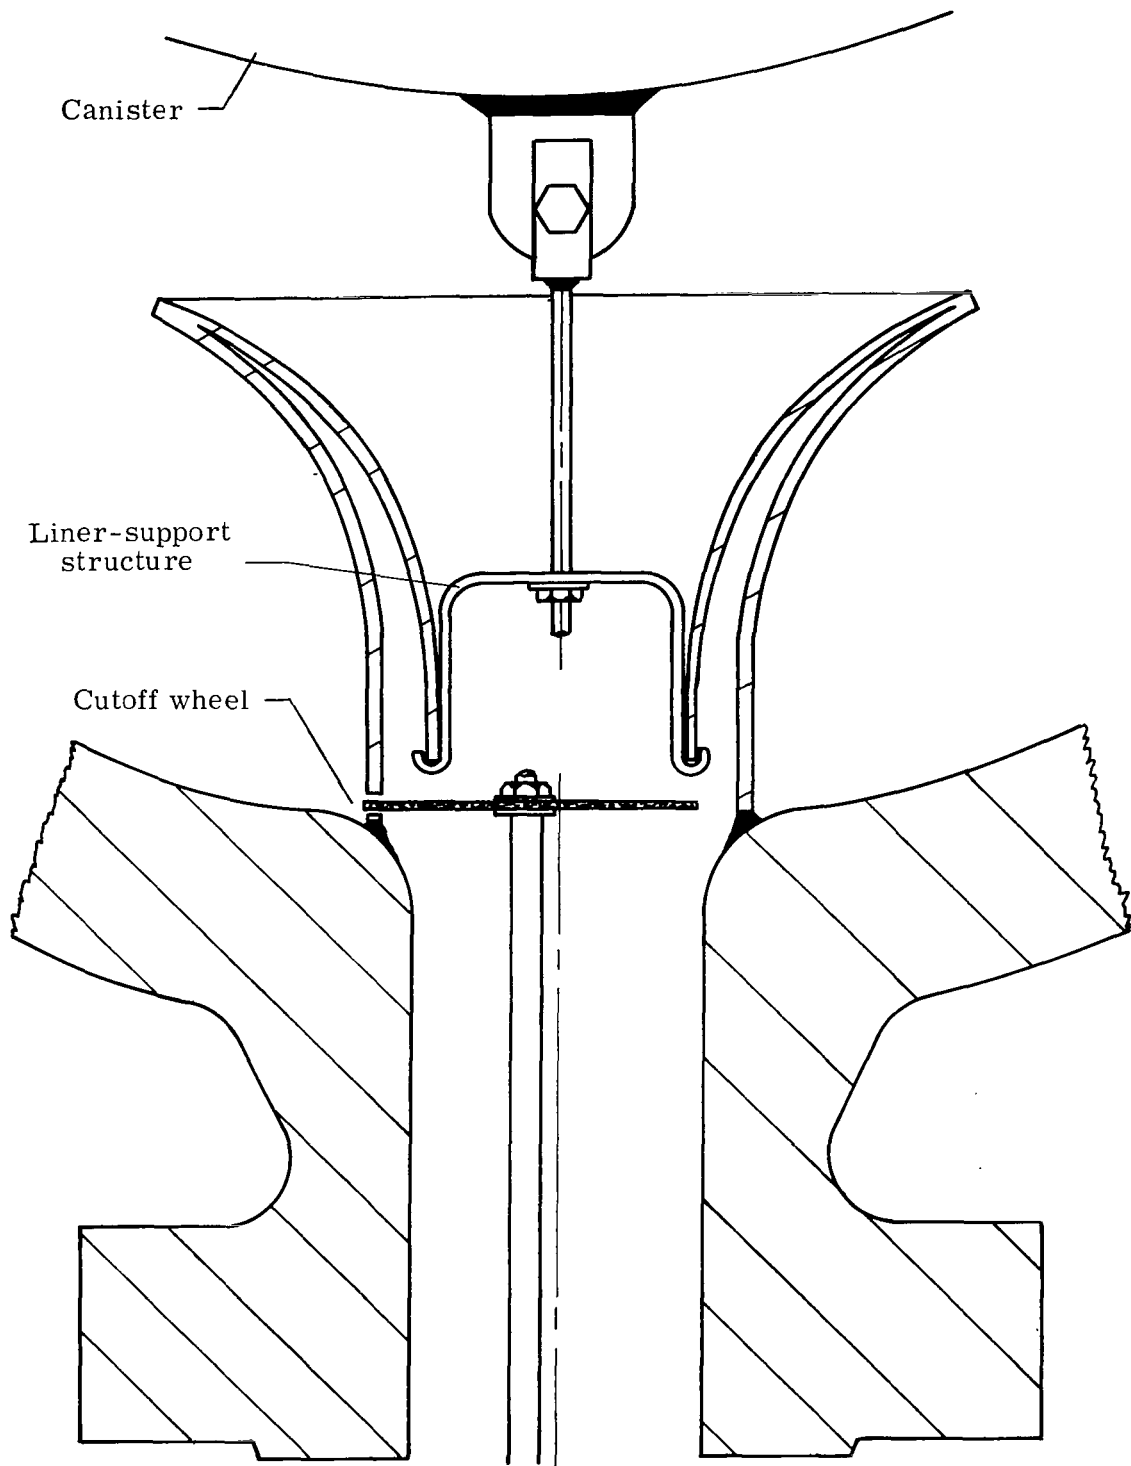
Cross-sectional view of air-storage-vessel nozzles with outside section of liner being removed.
